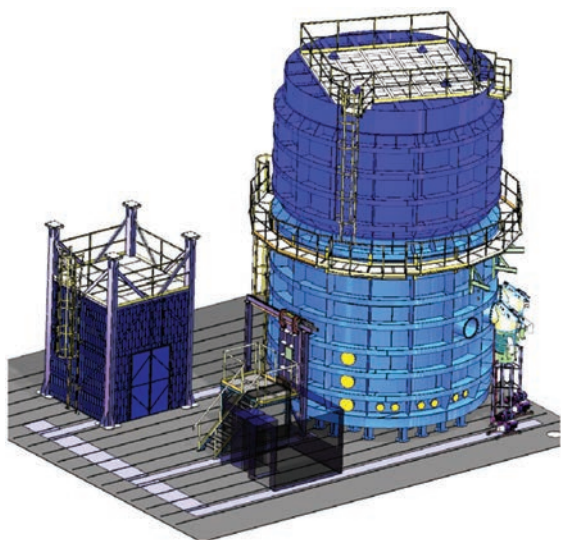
The welding workplace type PZ EZ30 JUMBO
